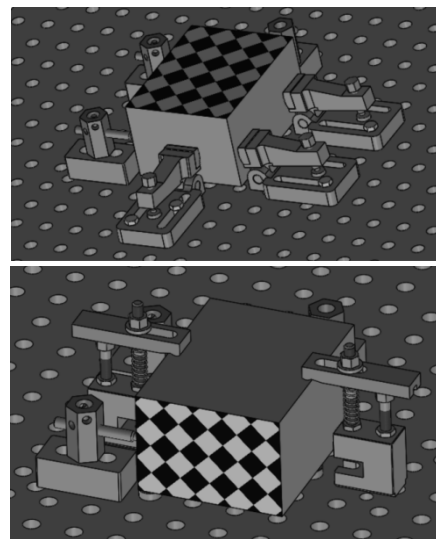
Clamping (to-be-machined surface in checkered pattern).
